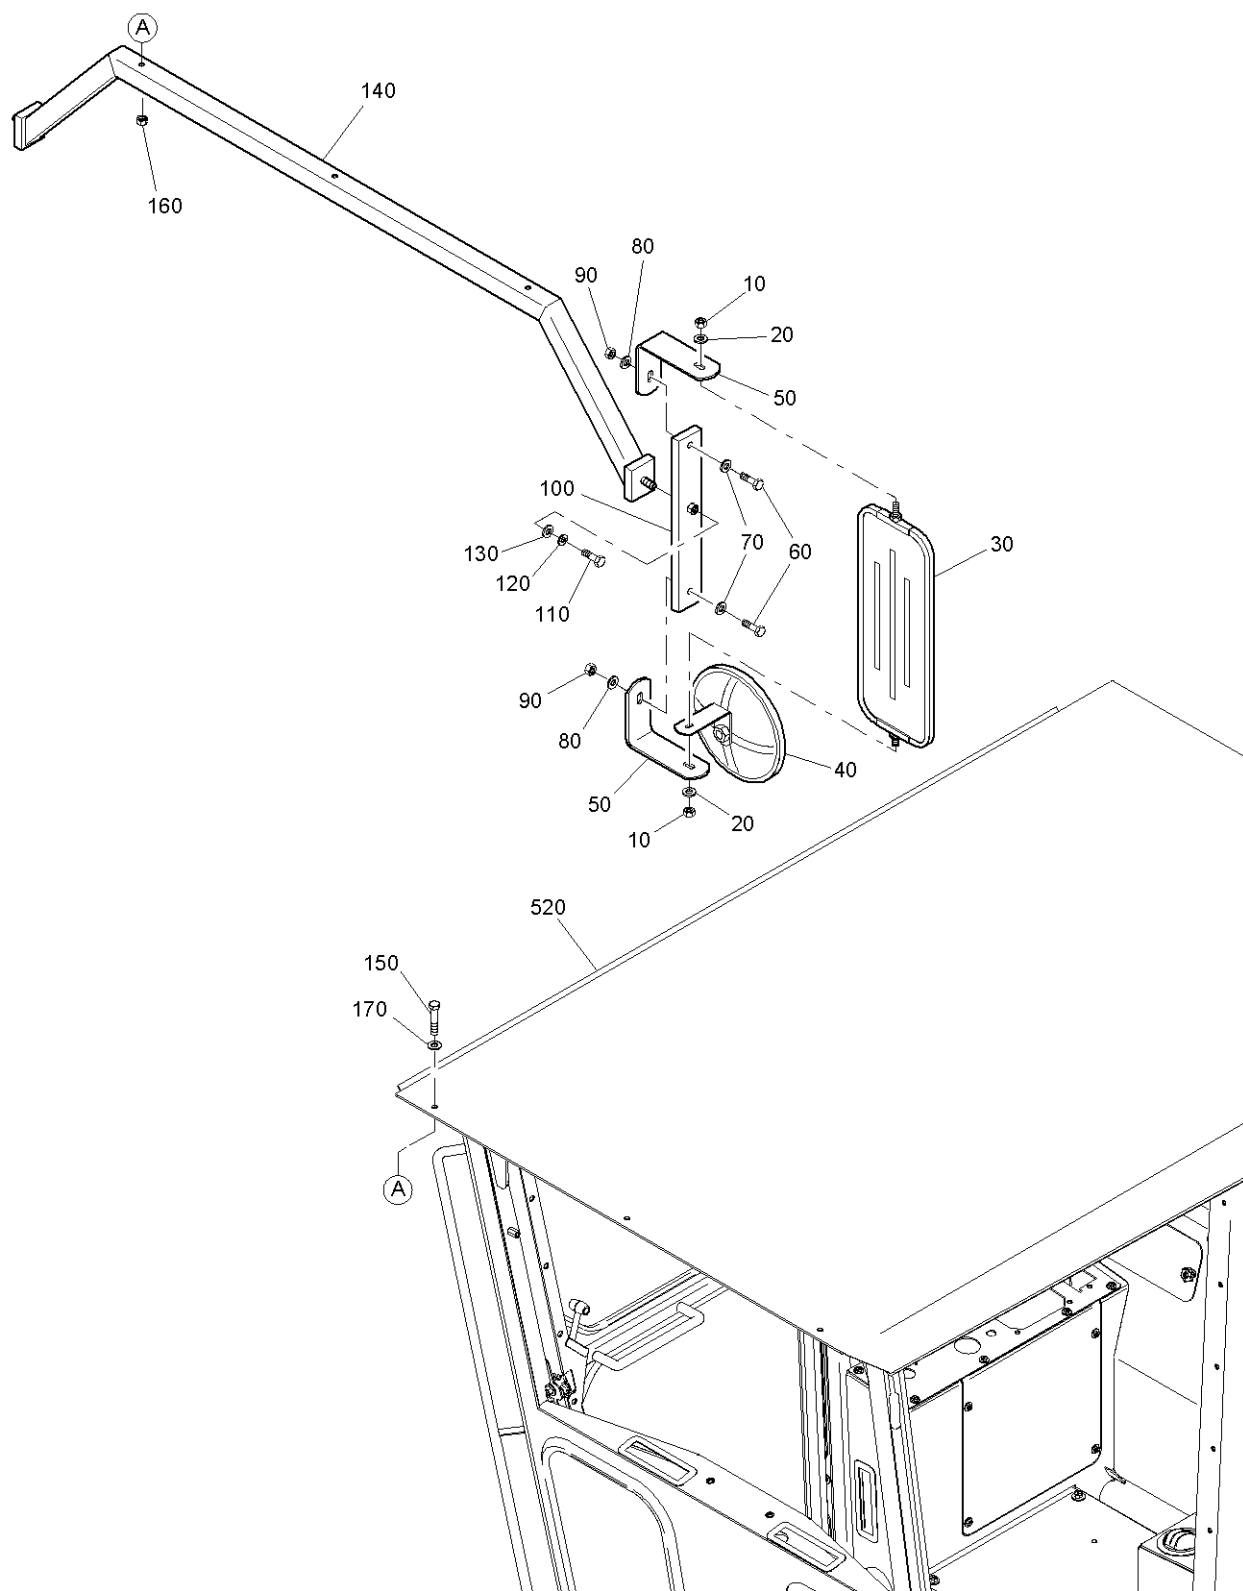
CAB ASSEMBLY (LEFT SIDE VIEW) (SHEET 1 OF 4)
